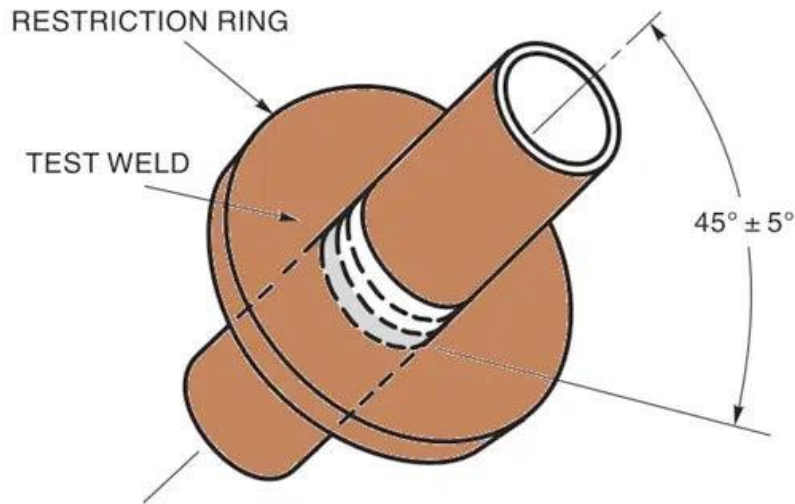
6GR welding position for pipework (Zheng, 2024)
